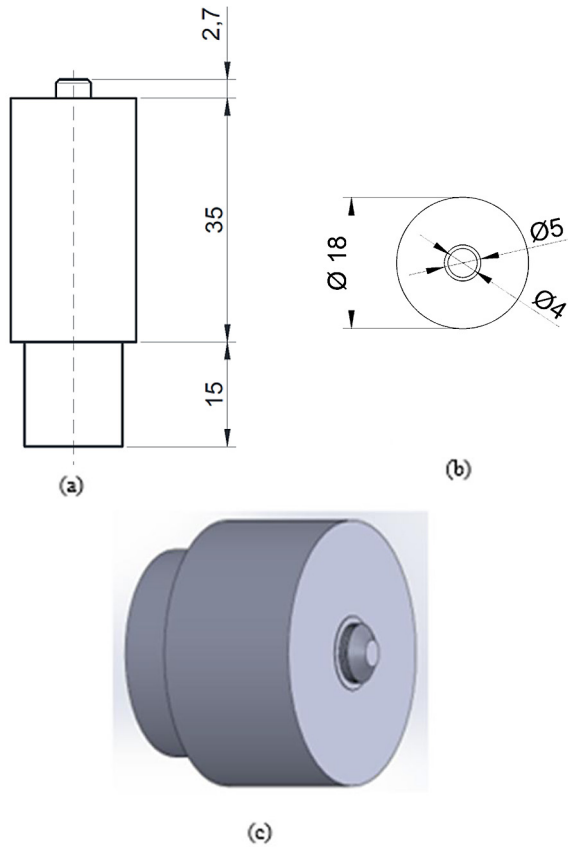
FSW tapered thread design: (a) tool height, (b) tool diameter, and (c) 3D design
